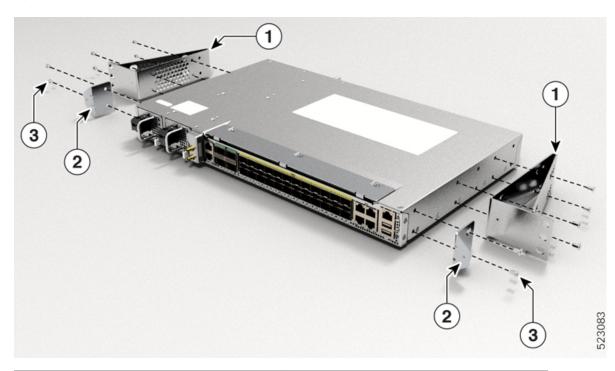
Installing Cable Management and 23 inch Rack-Mount Brackets in the Front
